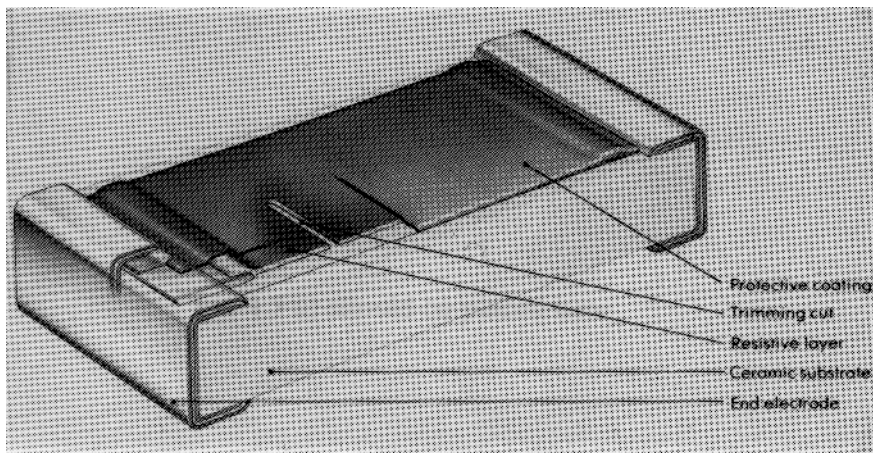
a): Surface mounted resistor, rectangular shape.
